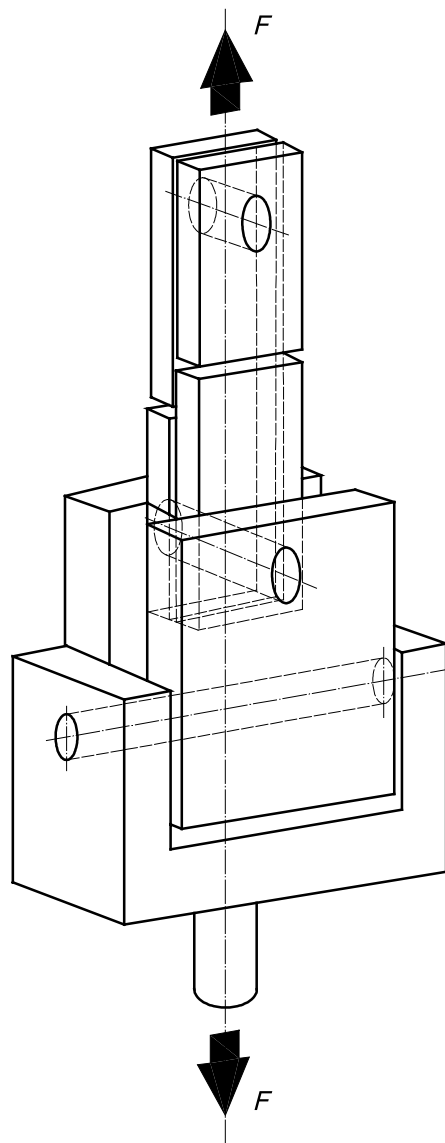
Example of device for loading the specimen in a tensile-testing machine
